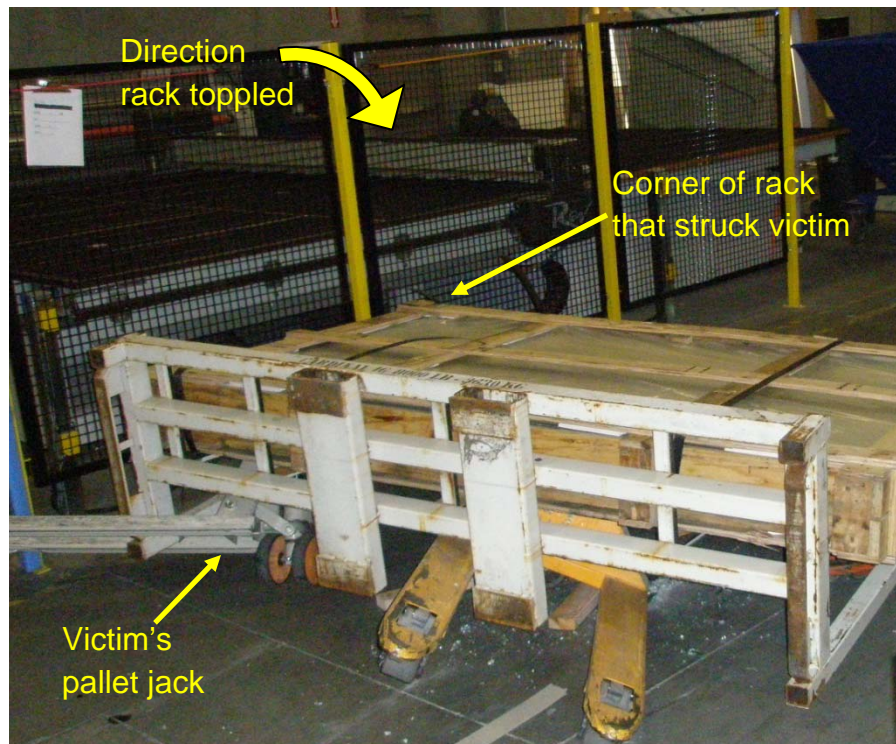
Incident site with "L" rack in final position and manual pallet jacks still in place.
